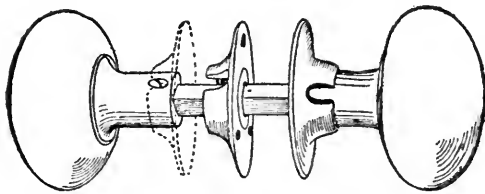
Knob With Spindle—Screw Partly Covered.
